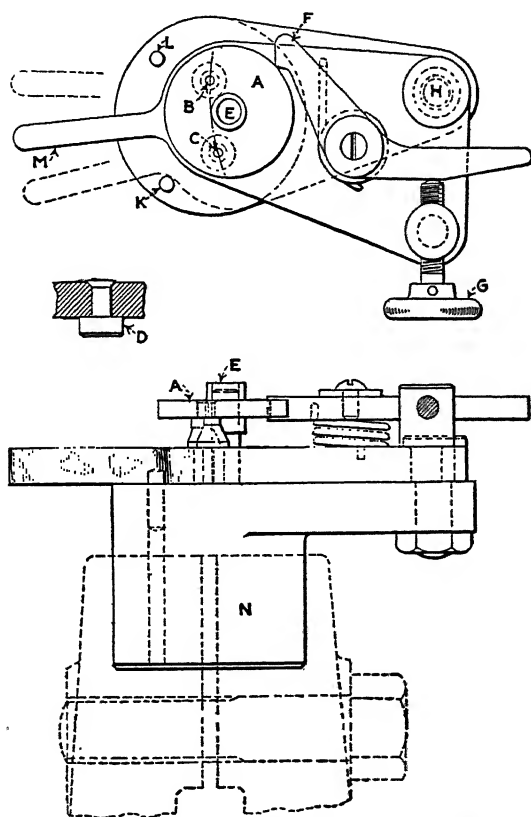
Swinging Type Riveting Fixture for Two Holes
